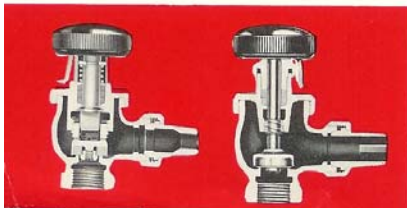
Left No. 30 Spring Packed Valve. Right — No. 88 Packed Valve.
